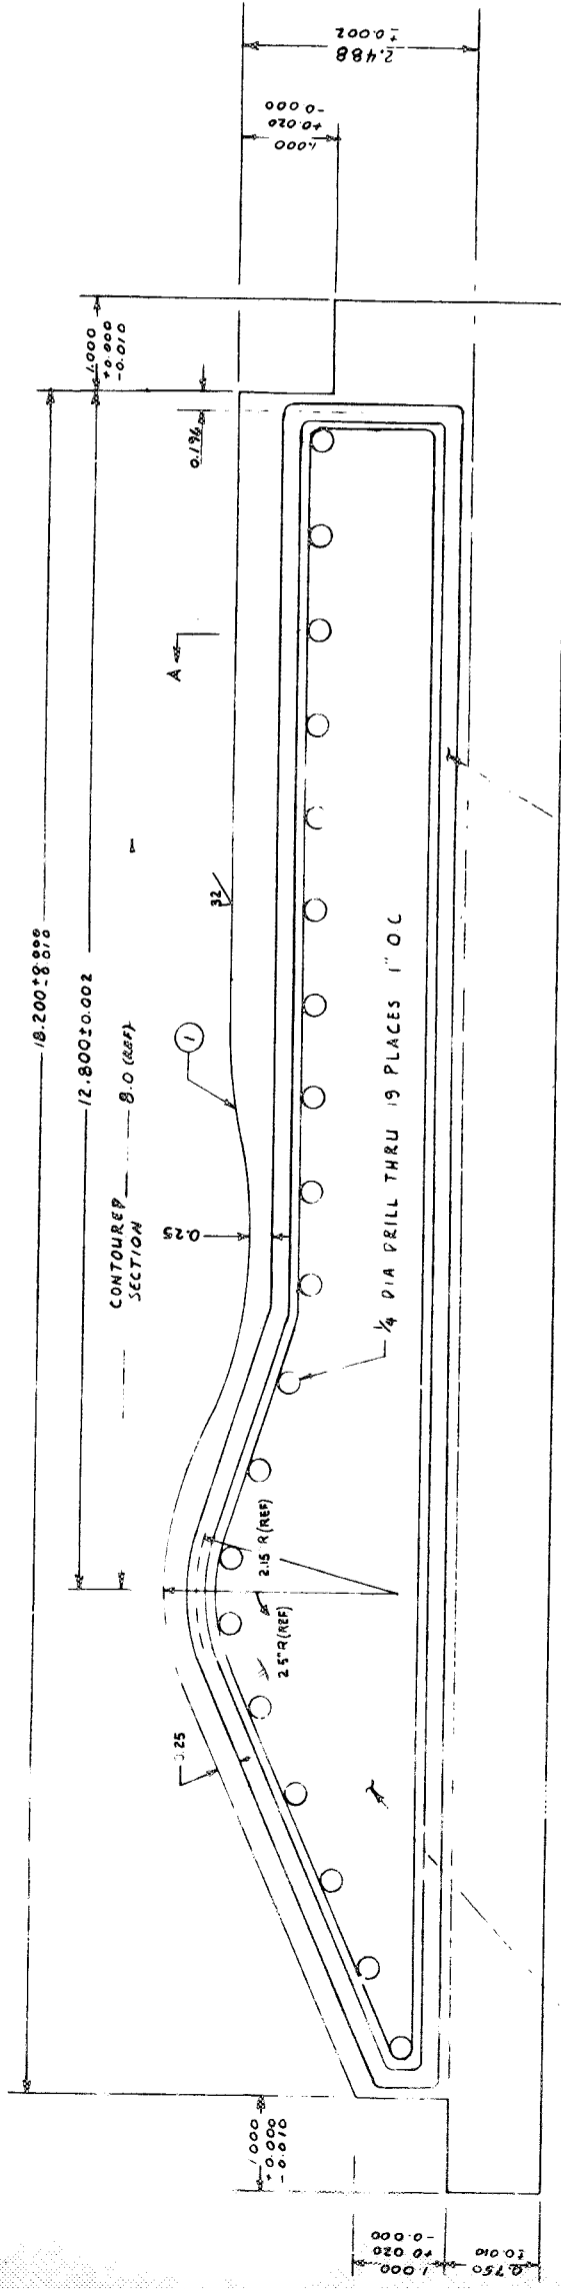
shows the transition section from air supply to the nozzle section as well as the mounting of the nozzles and the center wedge. The framework section is fabricated of high grade steel. Close tolerances machining and ground surfaces allowed accurate positioning of the component. Once the component parts were positioned relative to one another, they were match drilled and oversized 1/2 inch harden steel pins were inserted. The assembly was then bolted together with 1/2, 3/8 and 1/4 inch, high tensile strength steel bolts.
